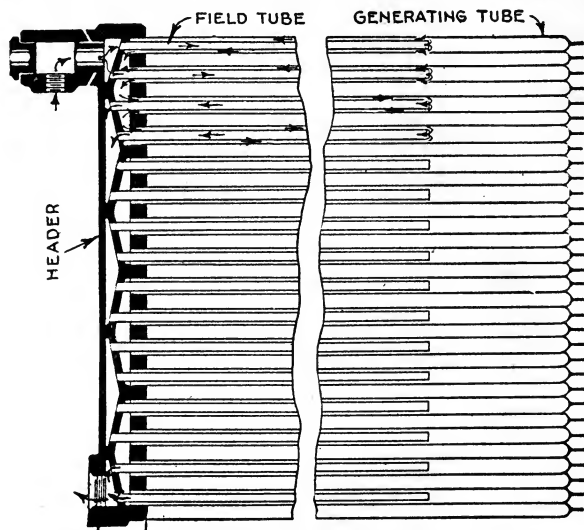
,728.—Talbot boiler header and tubes. The header consists of two sets of overlapping compartments, into one of which is screwed the open end Field tubes and into the other the generating tubes. The end of each generating tube is welded together so as to close it. These closed ends are free to expand and are supported in front by perforated sheets of metal. Both tubes are secured by screwed joints with threads having double the standard pipe thread taper which makes it easy to remove them, the fit is sufficiently tight for 1,000 lbs. pressure using standard weight pipe.
